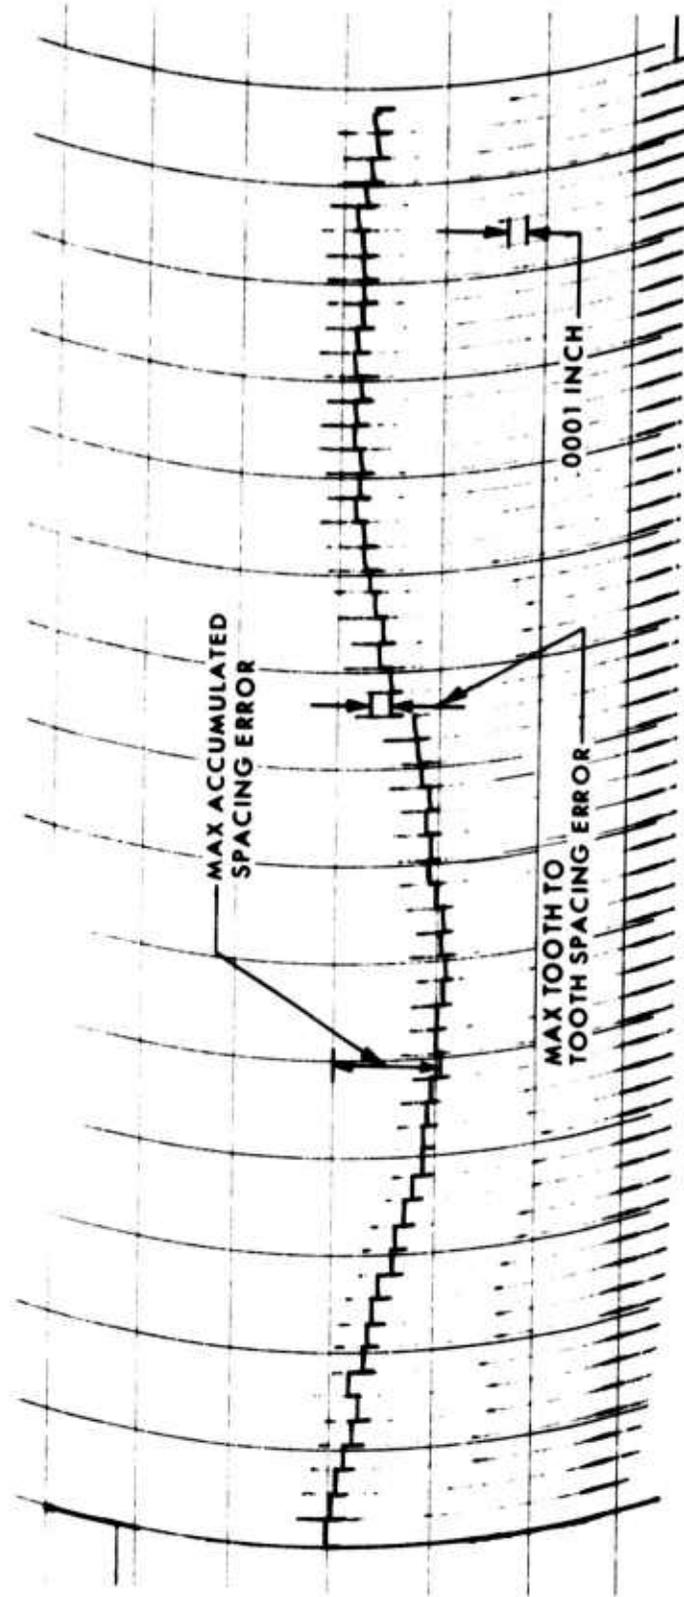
Tooth Spacing Error Chart, Large Diameter First-Row Pinion Gear.
